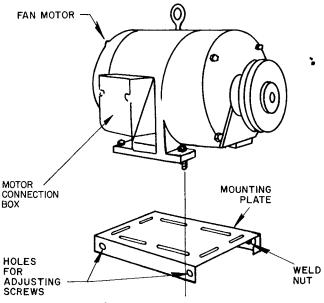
50BJ,BK028 and 034 Motor Mounting
